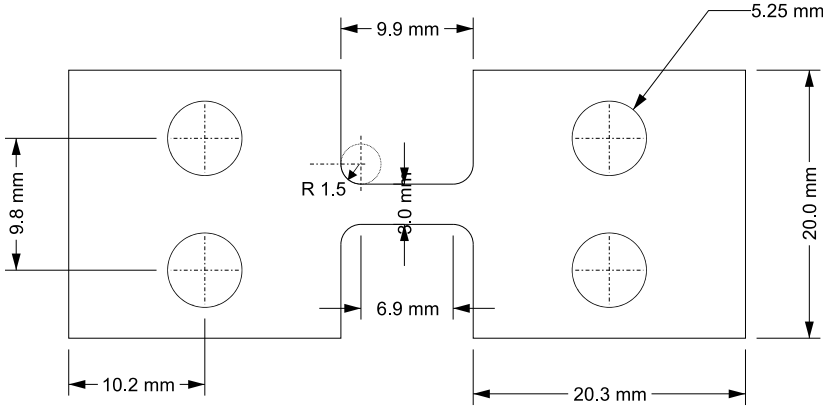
Drawing of pin-loaded sheet specimens for Kolsky-bar deformation
